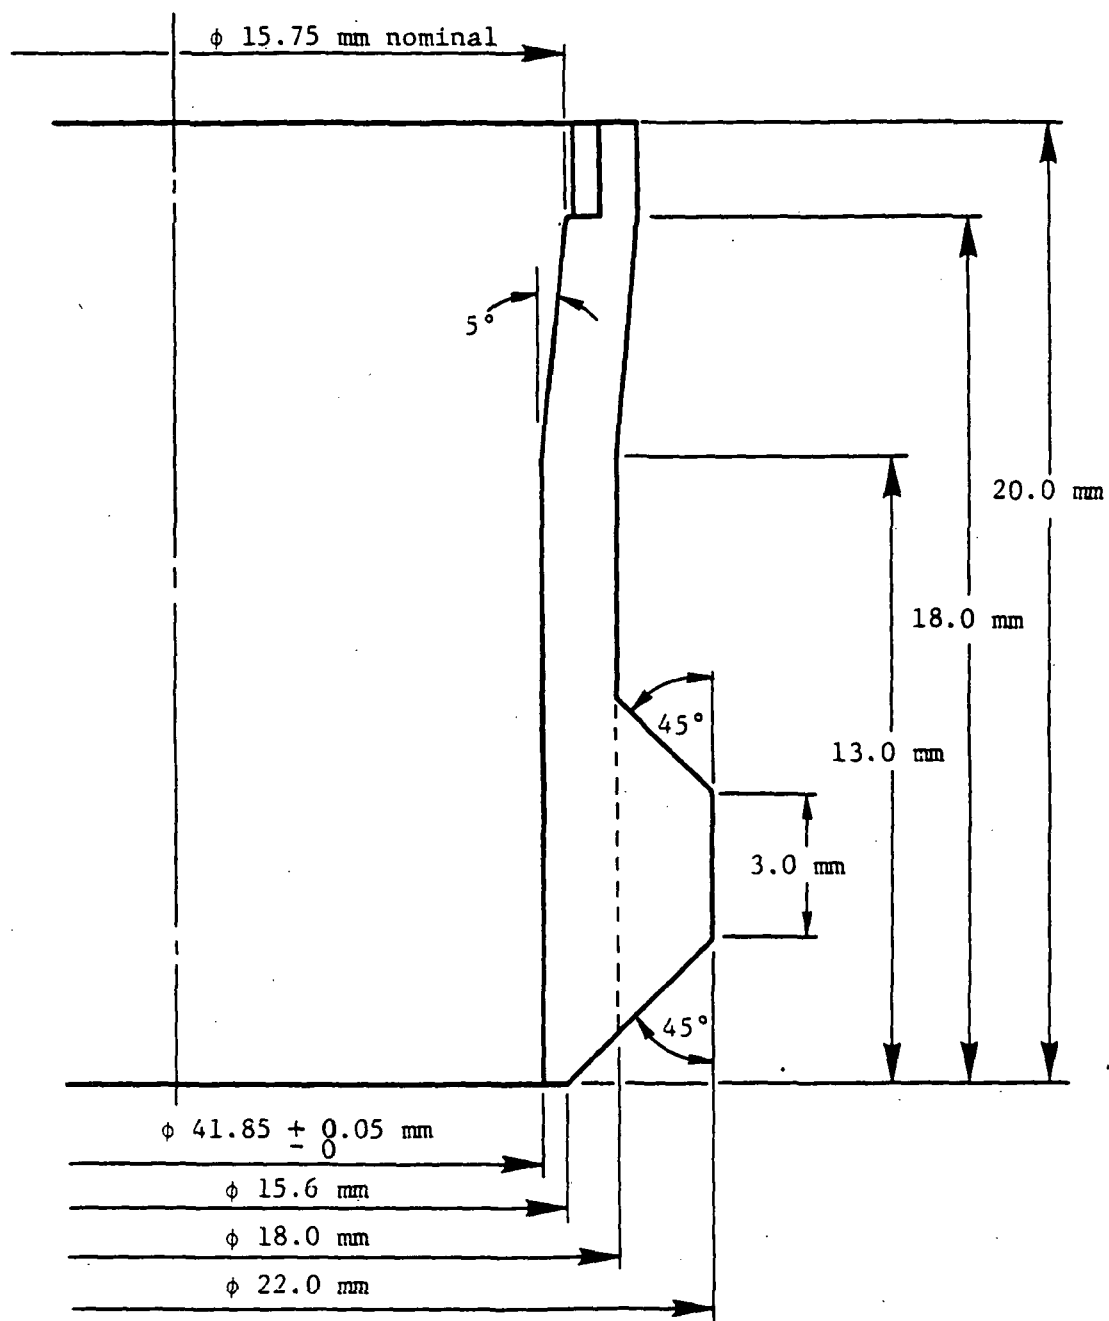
Seal Geometry for Automotive Stirling Engine Application
